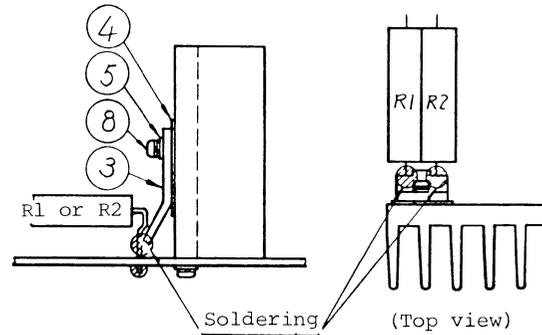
HLP3-3 Circuit Board Assembly (LY-43361-3) (for Europe) (2nd edition)
